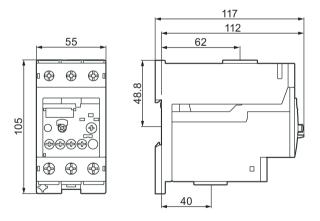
3RU2136-..B1 and 3RU2936-3AA01
